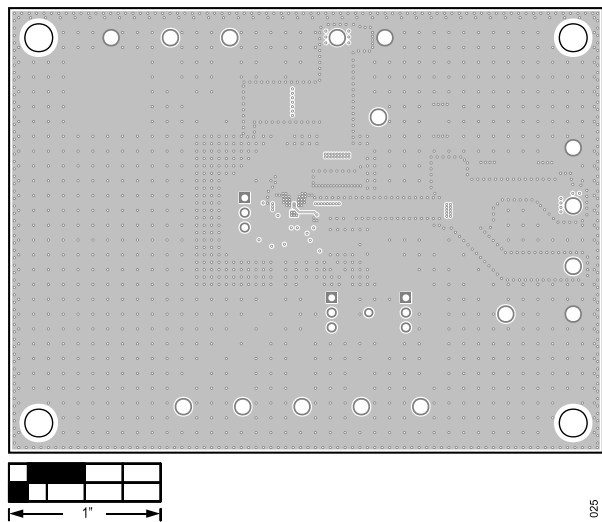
LT80603EVKIT# PCB Layout—Layer 2
